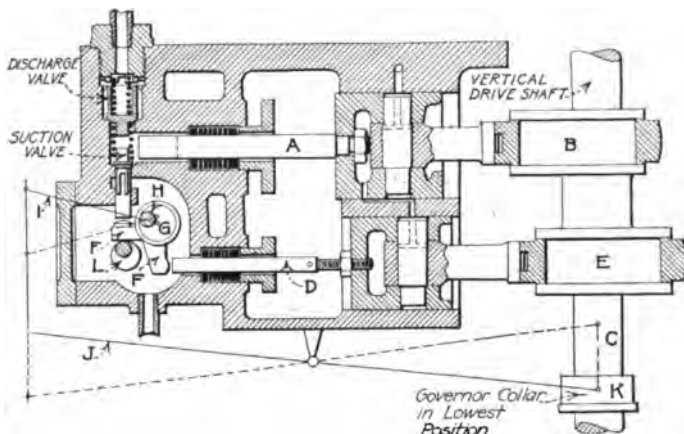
Busch-Sulzer type B Diesel fuel pump.
